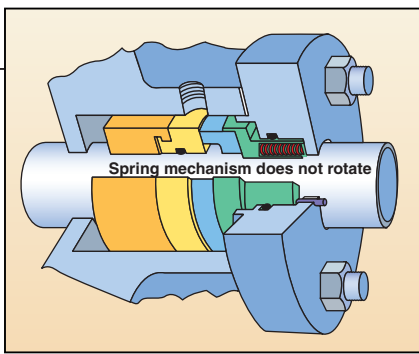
Springs mounted in the stationary part of this stationary spring seal assembly automatically compensate for any lack of squareness between the stuffing box face and the shaft
